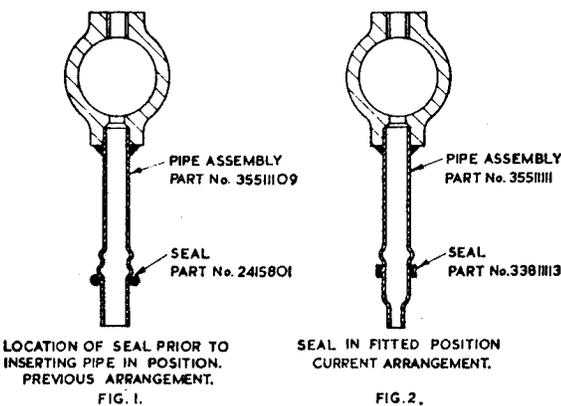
Fitting Seal to Rocker Shaft Oil Feed Pipe.
